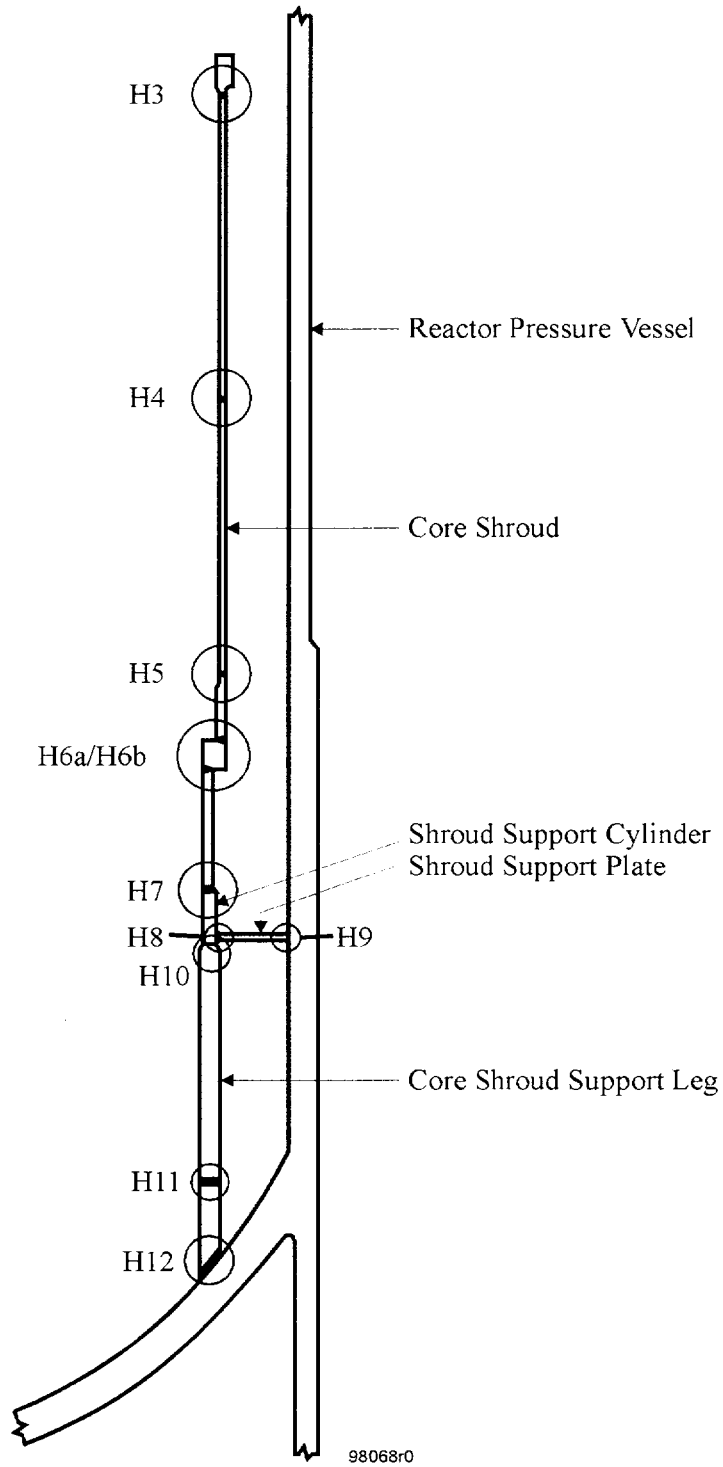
Typical Arrangement of Core Shroud and Support Structure (BWR-6)
